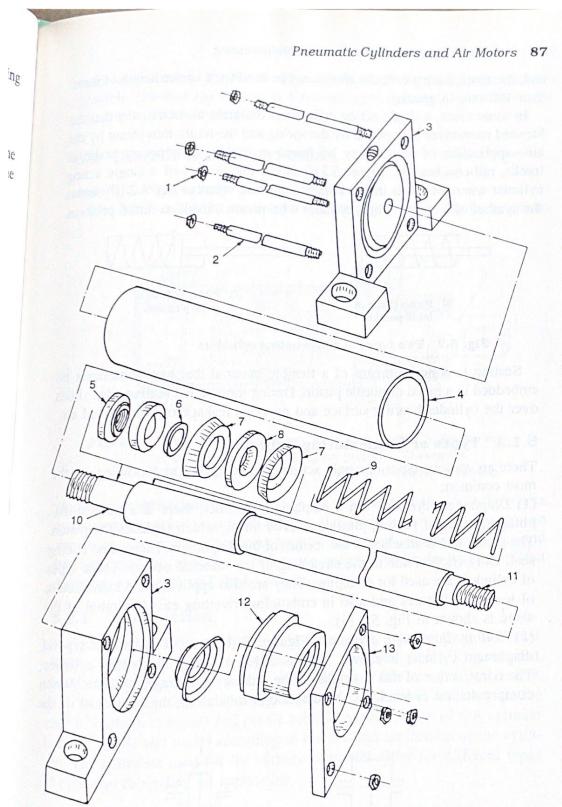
(b) Single acting cylinder-exploded view: 1. Tie-rod nut 2. Tie rods 3. End covers 4. Tube 5. Nut to join piston and rod 6. O-ring 7. Cup seal 8. Piston 9. Spring 10. Piston rod 11. Threaded end of piston rod 12. Bush 13. Bush retainer
